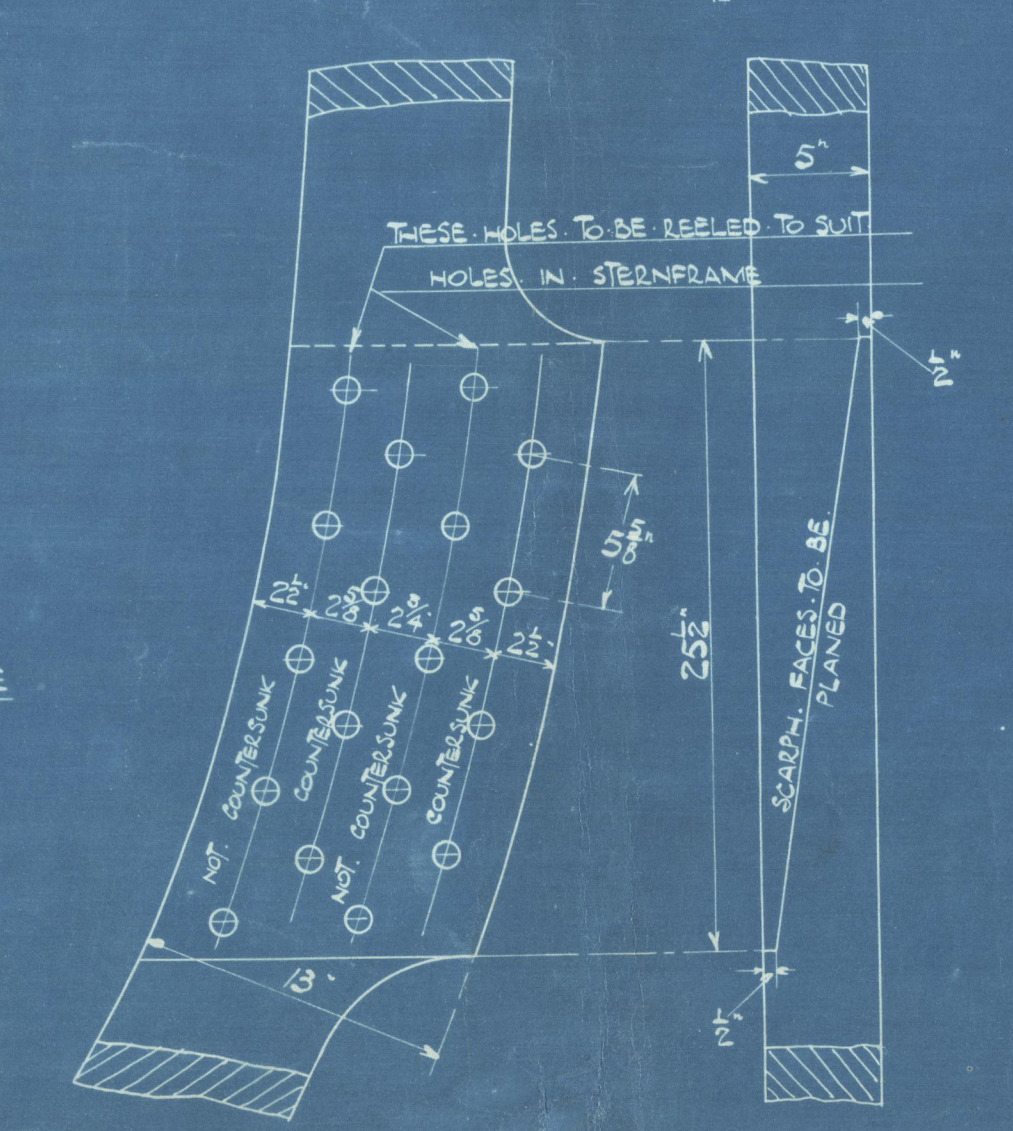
DETAIL OF RUDDER COUPLING & TOP PINTLE
